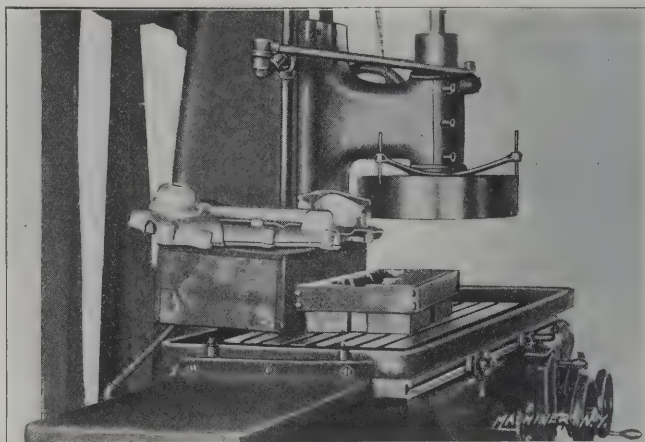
The Acme of Simplicity in Fixture Making. Face Grinding the Steering Gear Casing
